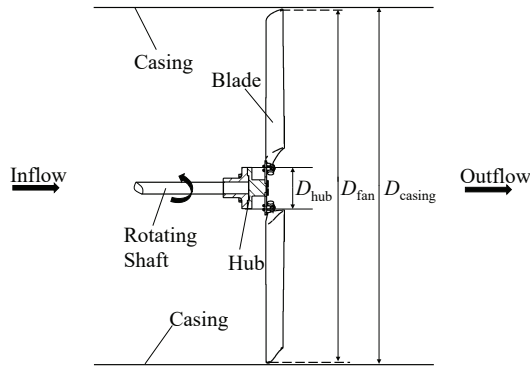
Example of the Structure of a Rotor-only Axial Fan: showing casing, blade, rotating shaft and hub.
